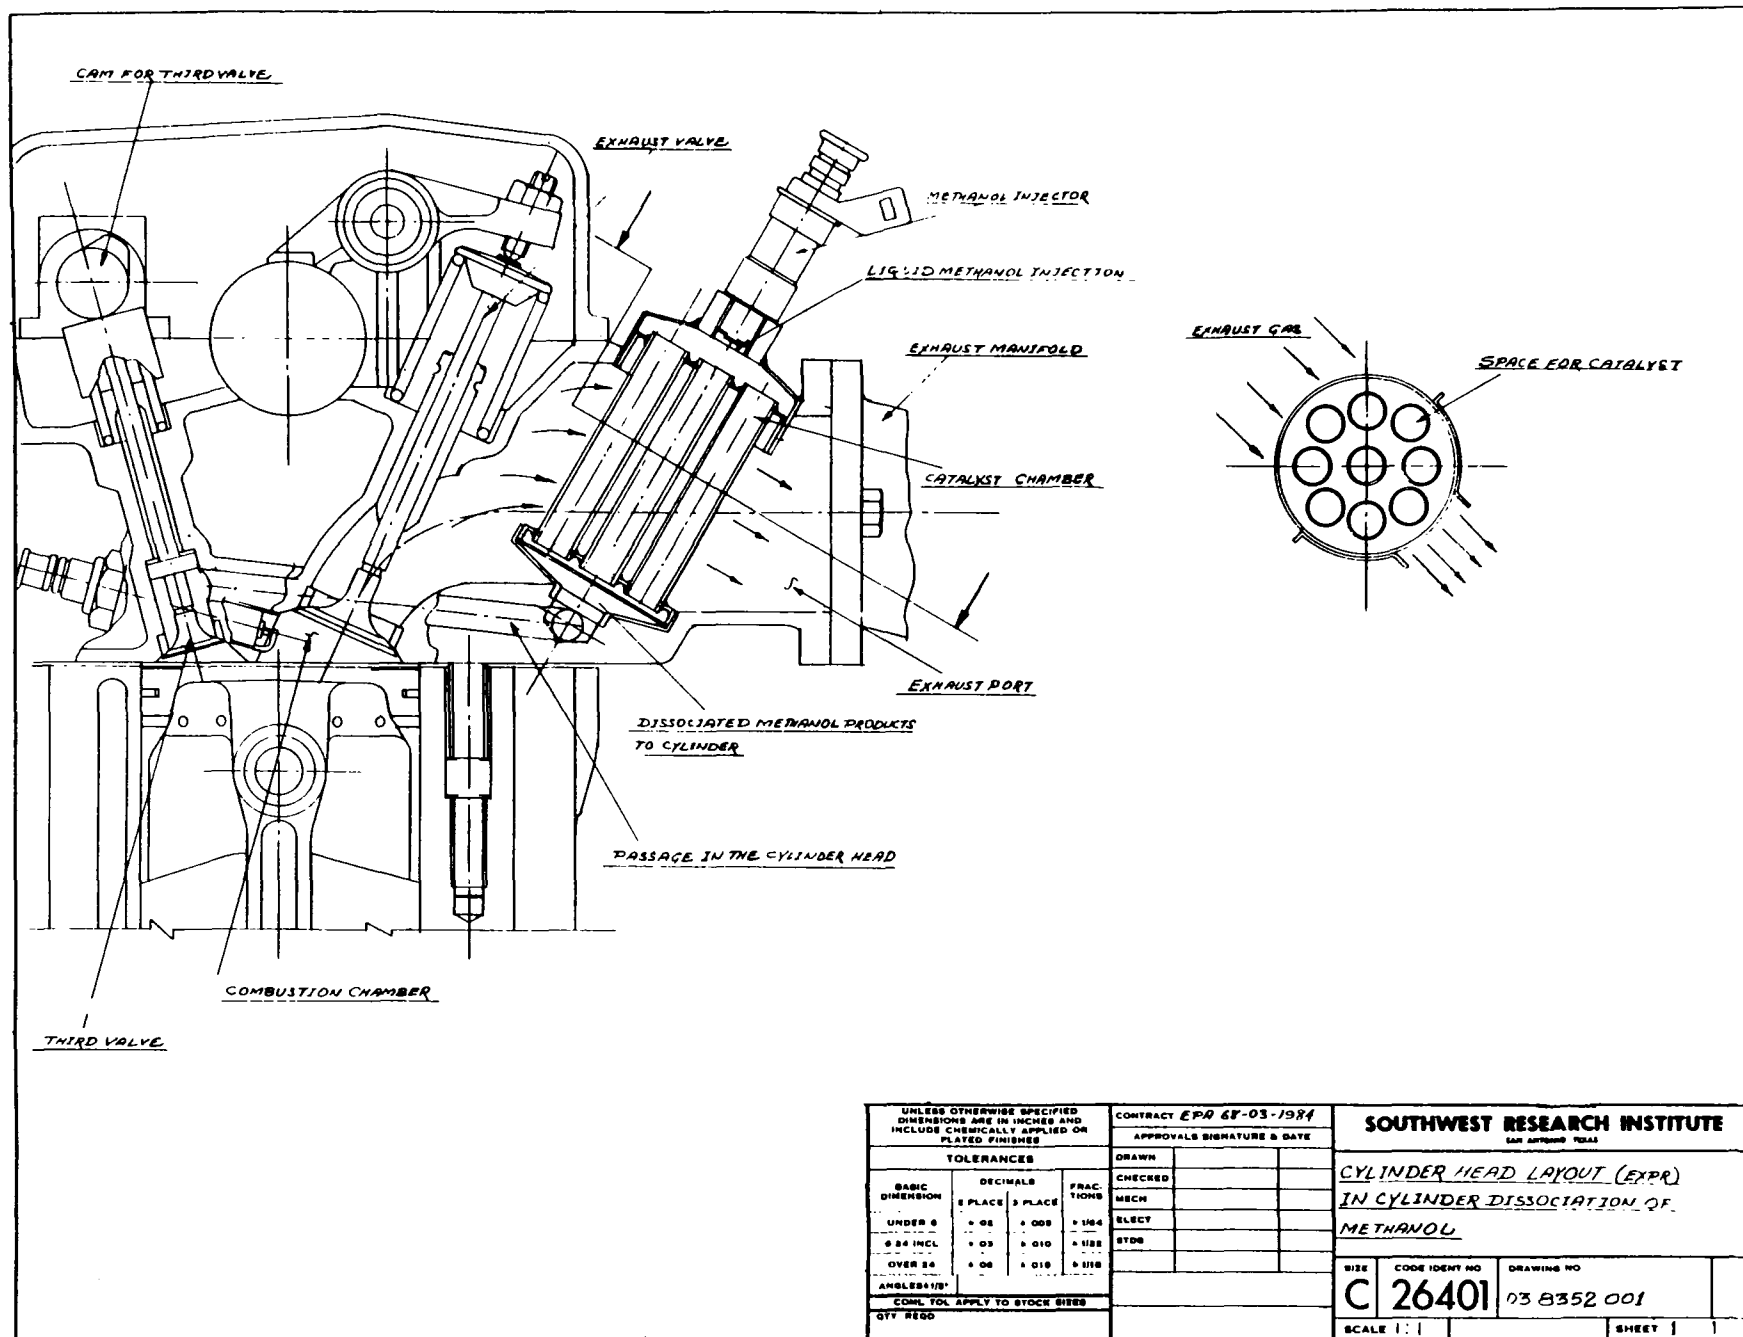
CYLINDER HEAD LAYOUT - SINGLE PASS CATALYST CHAMBER
